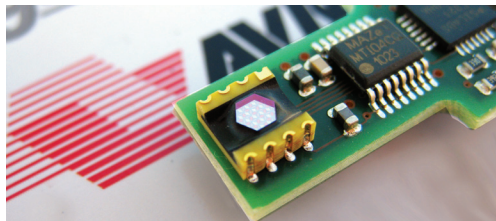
A MAZeT color sensor (with hexagonal window) mounted to a small PCB
